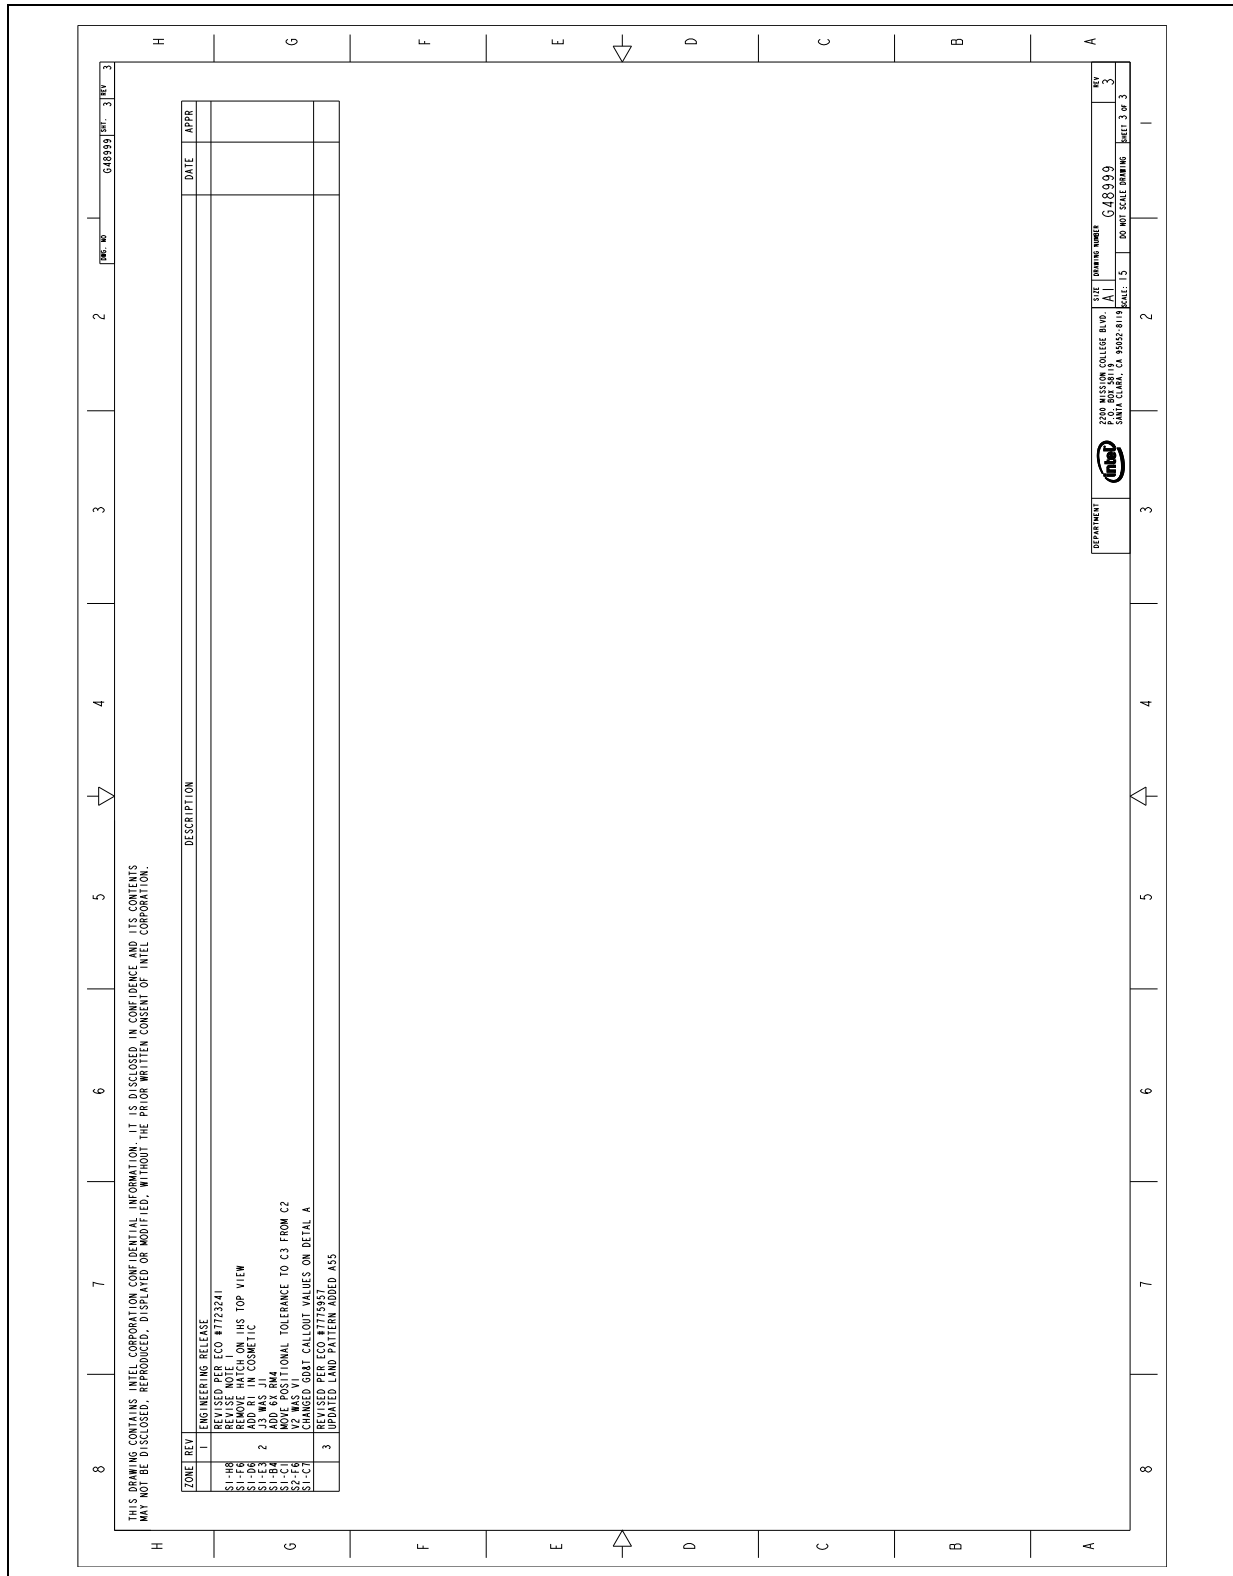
Processor Package Mechanical Drawing (Sheet 3 of 3)
